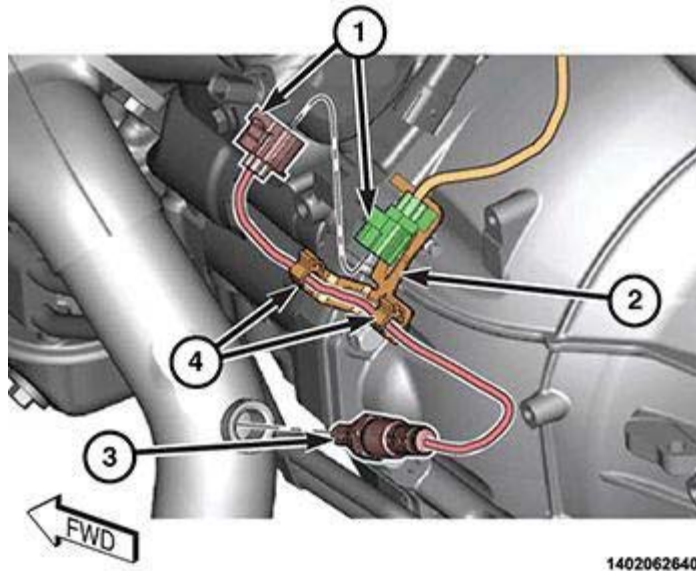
Oxygen Sensor Wire Harness Connector, Retainer, Oxygen Sensor & Oxygen Sensor Wire Harness
